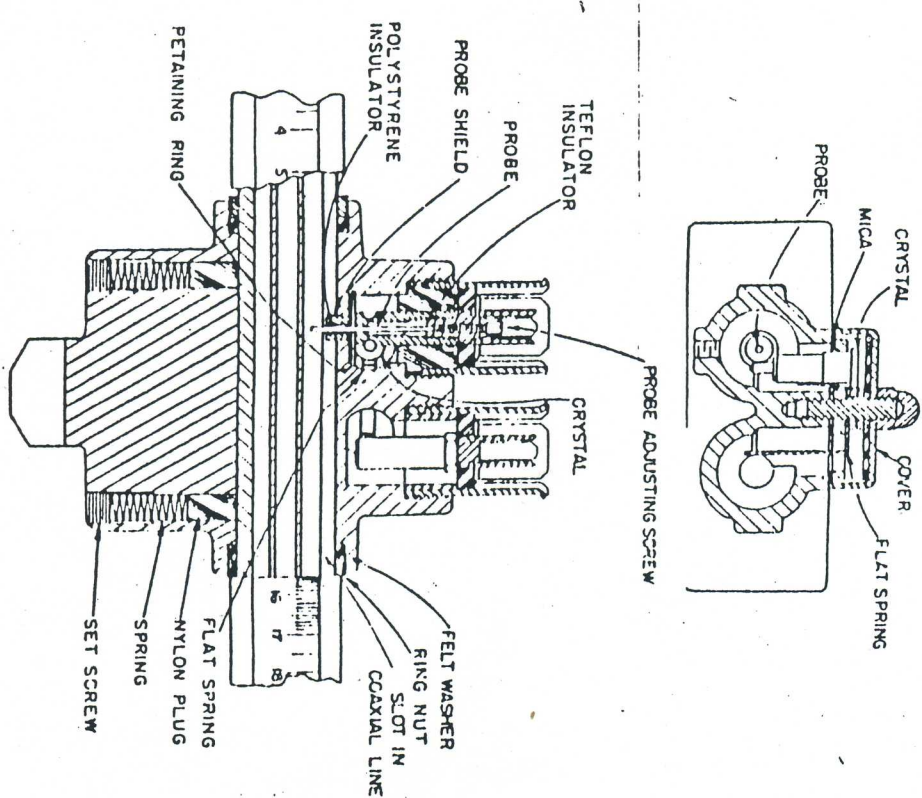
Cross-sectional views of the carriage on the Type 874-LBA Slotted Line, showing the crystal mount and the adjustable probe.
